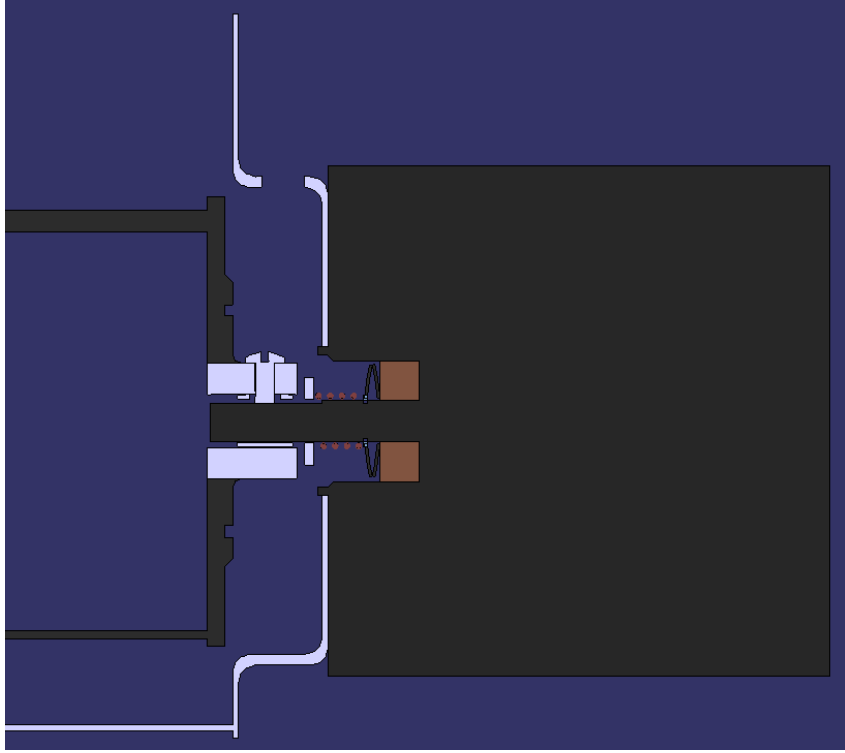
Section view of the turbine–motor interface illustrating the gap between motor junction piece and the flat washer. The corresponding bill of materials (BOM) for the shown components is previously provided in Figure 5.7.
